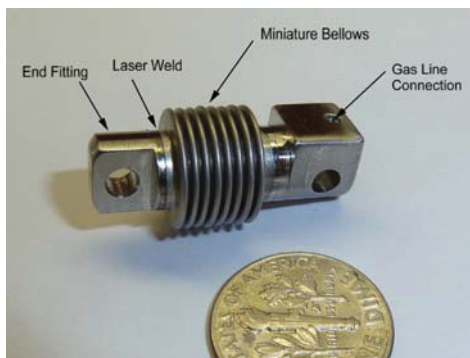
Example of end fittings laser welded to bellows.
